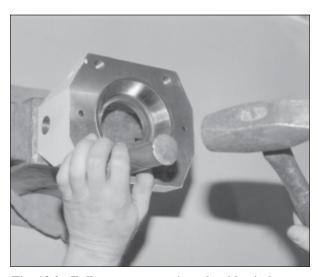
Fully seat race against shoulder in bottom plate.
